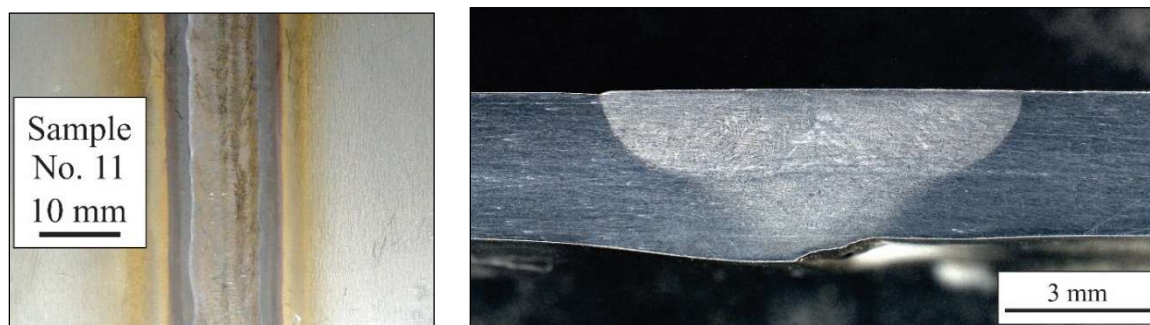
Specimen N° 11 - TAG, 180 A, filler wire 120 cm/min
